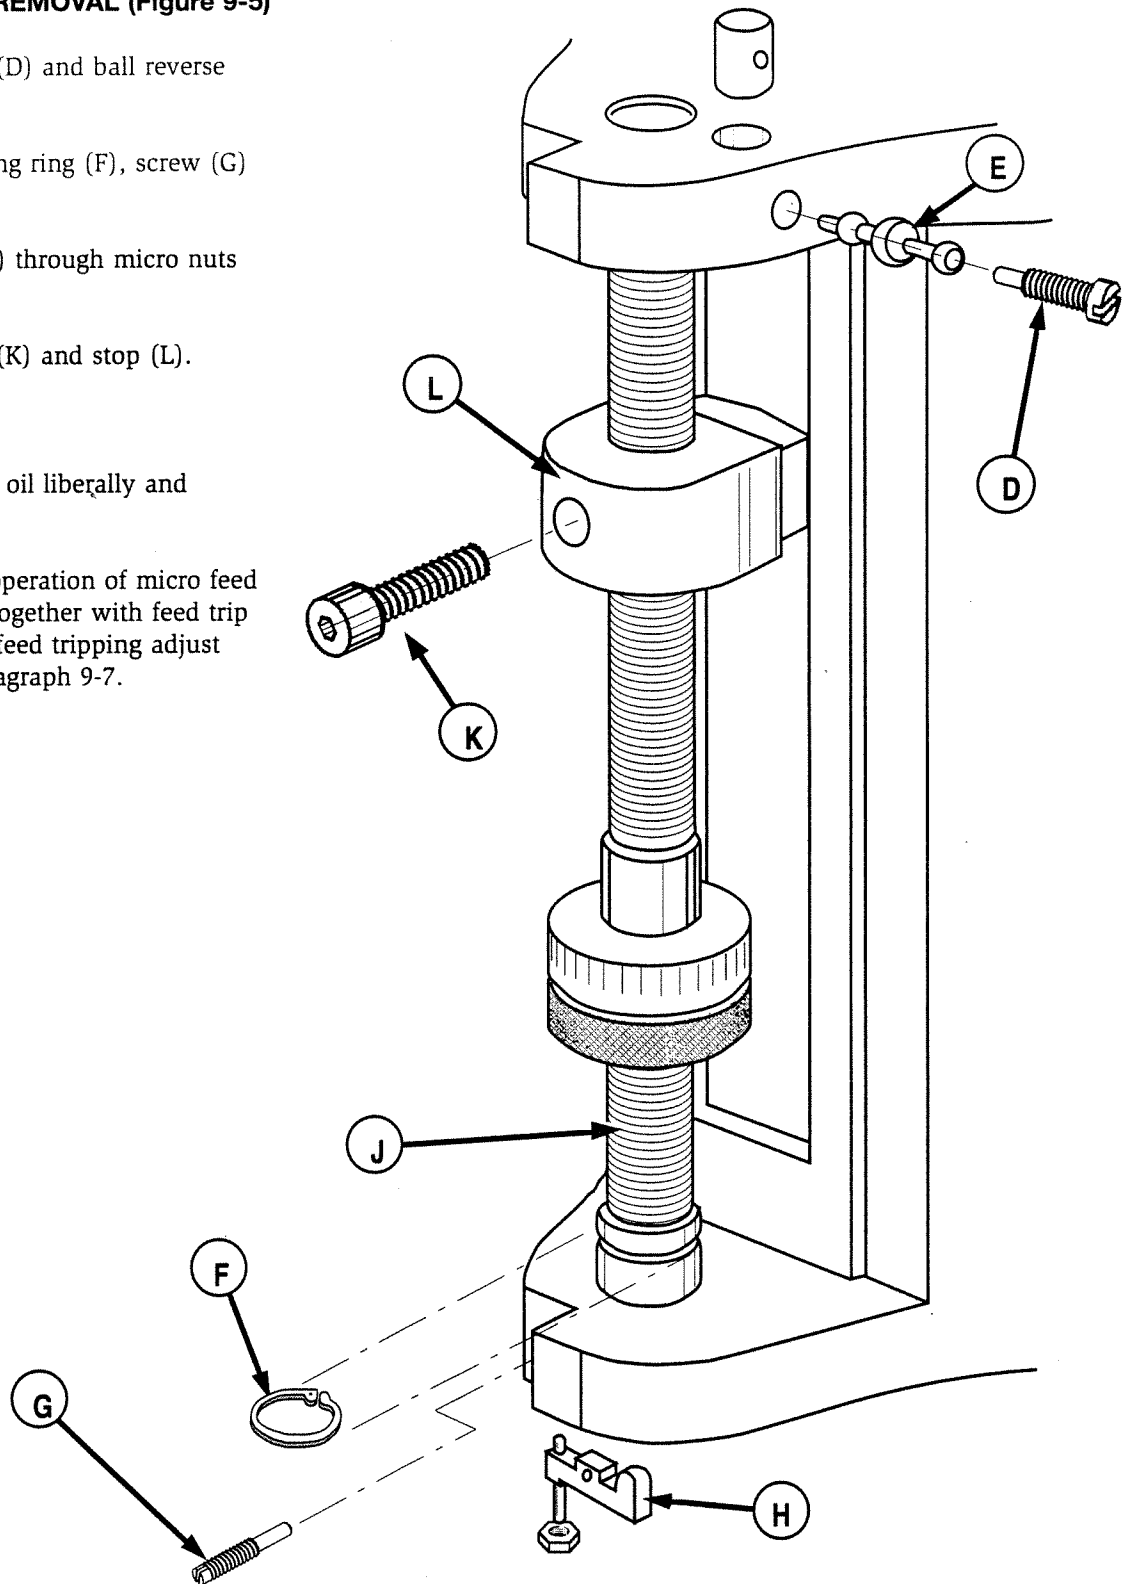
Micro Feed Trip Assembly and Quill Removal
